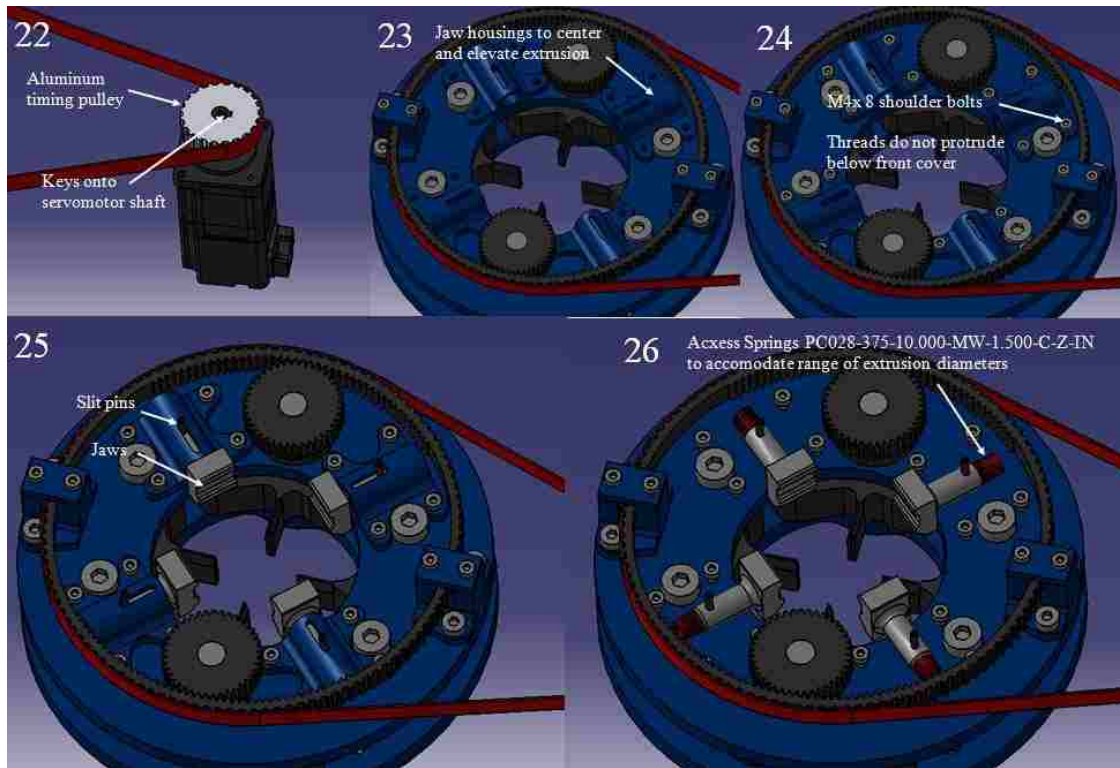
Step-by-step assembly of direct-drive adaptive cutter device (continued).
